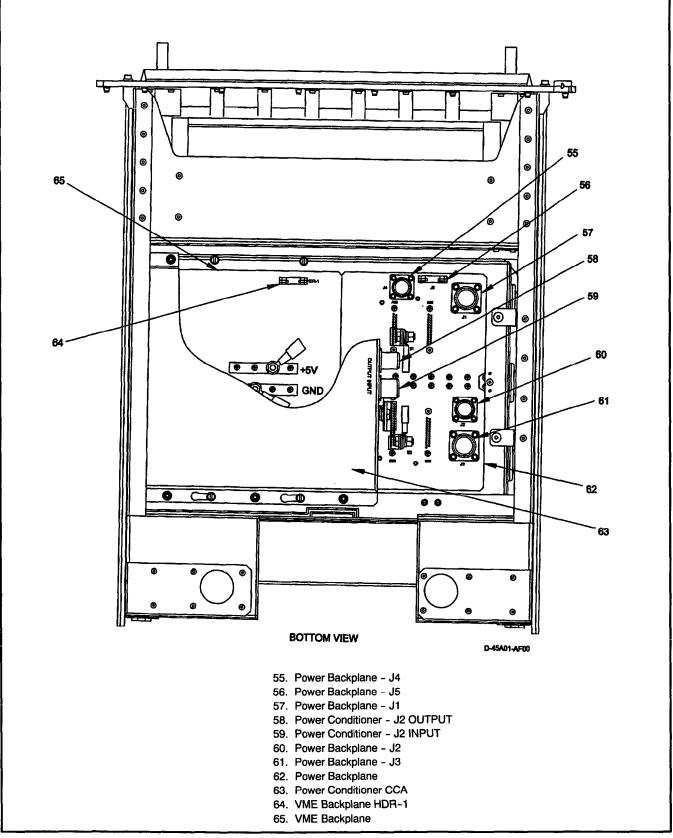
Control-Indicator Assembly C-12514/ASQ-225 and Control Indicator Set AN/ASQ-225 Components (Sheet 9)
